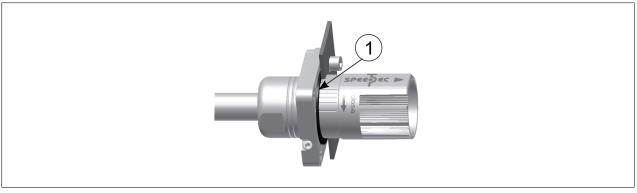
Attaching the metal flange to the connector (rear panel installation)
